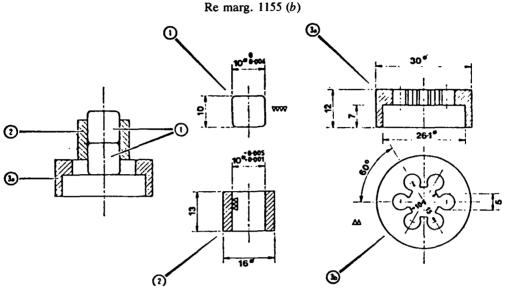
Impact device for substances in powdered form or paste-like form dimensions in mm
